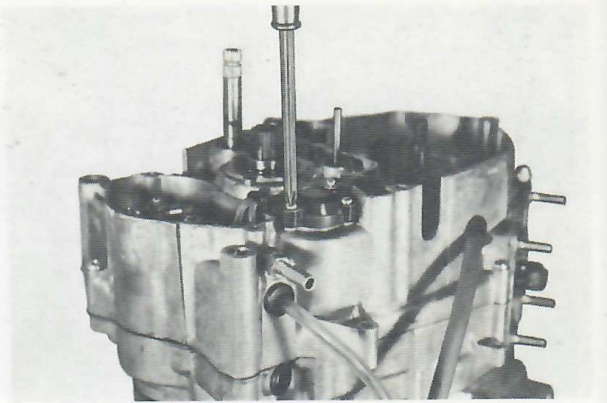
Unscrewing neutral switch fitting screws with cross head screw driver
